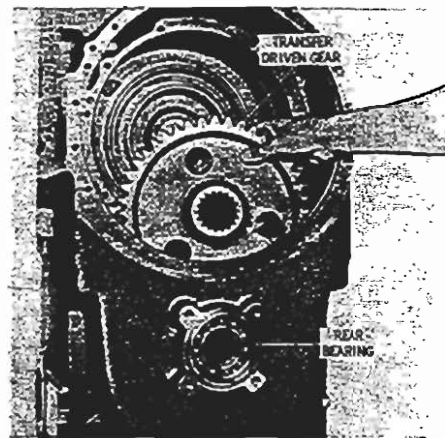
INSTALLING TRANSFER DRIVEN GEAR
